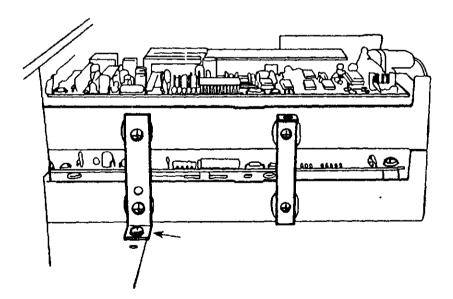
B: MD I/MD III Drive Removal - Revision B and C Chassis
